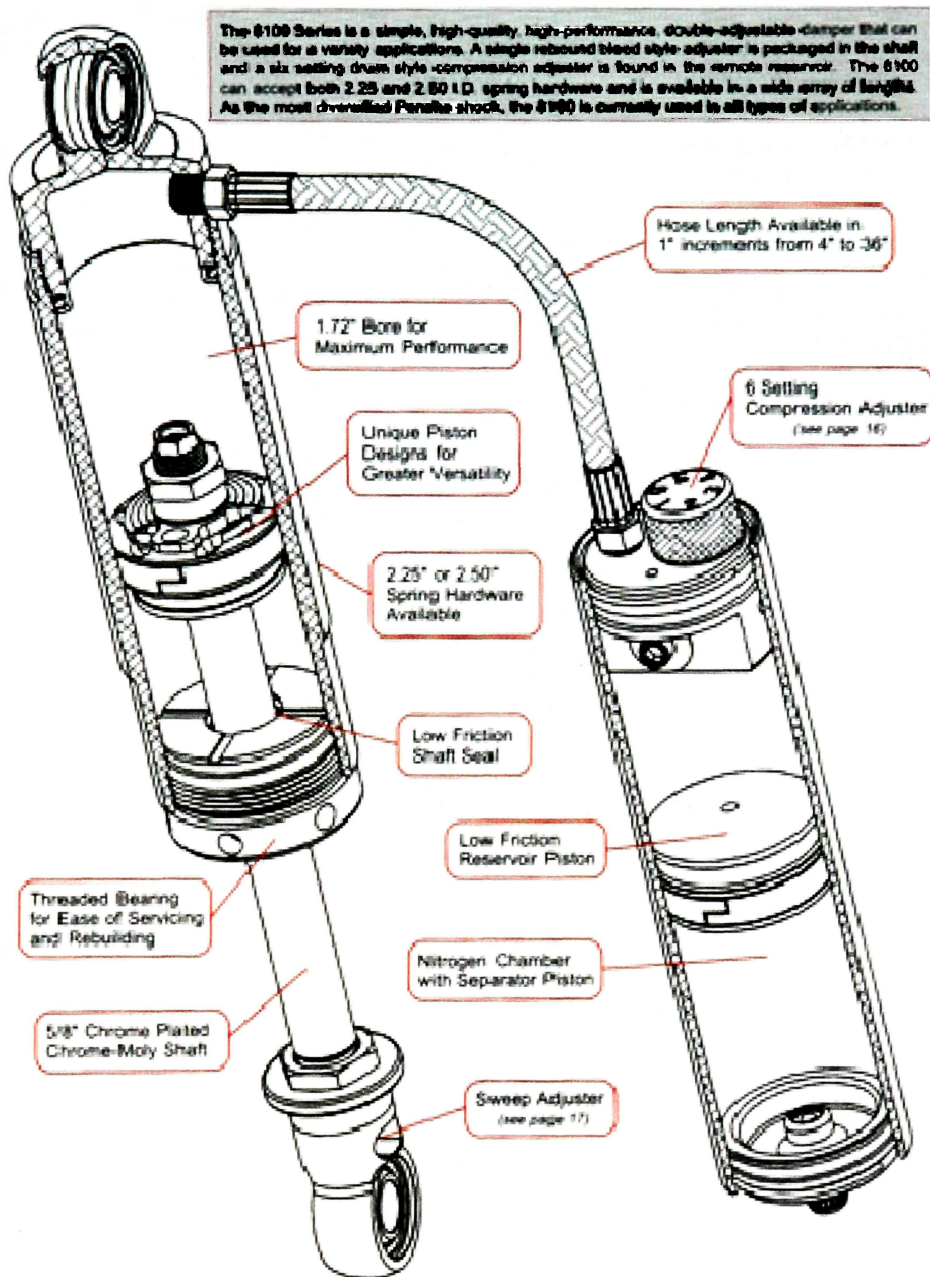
Penske Mono Tube Damper Courtesy of Penske
